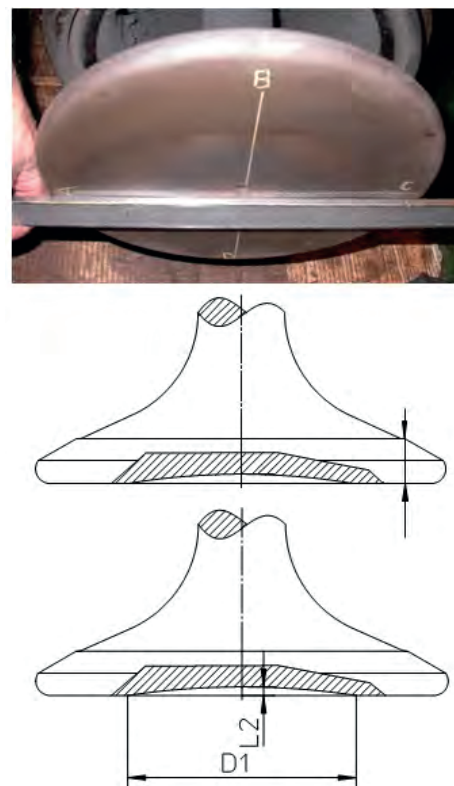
Illustration of the valve face “burnt depth” (corrosion depth) measurement procedure on 2-stroke valve spindles.
